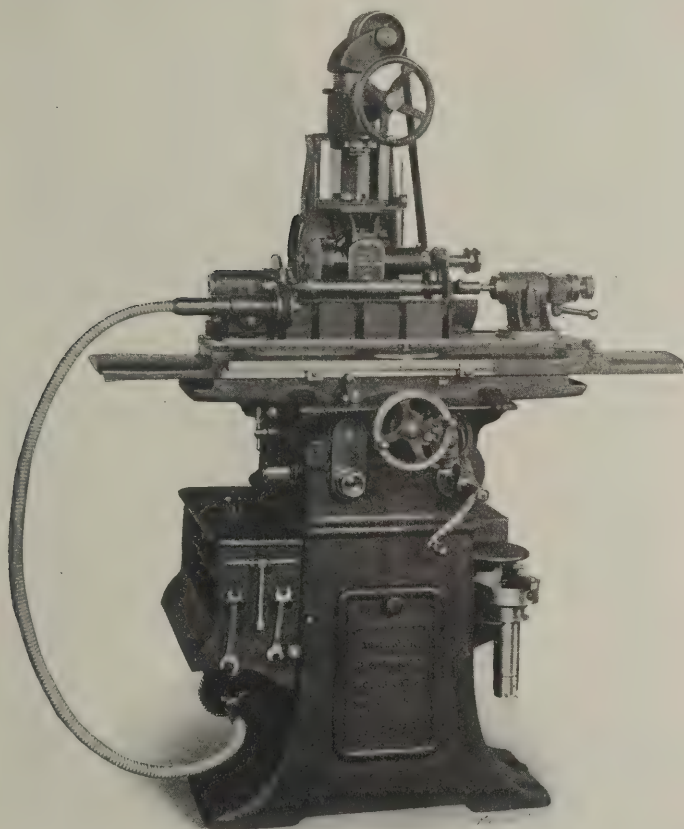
Universal Tool-room Grinder, built by the Walker Grinder Co.
